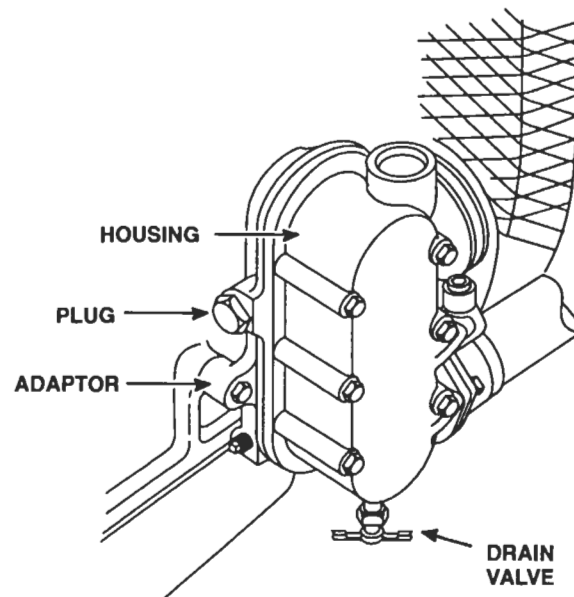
Lubricating Oil Cooler Mounting (Radiator Cooled Engines)
